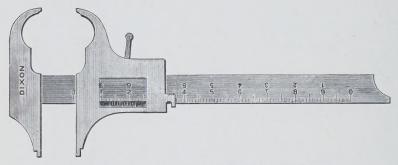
THE BOLEY MILLIMETER CALIPER GAUGE
